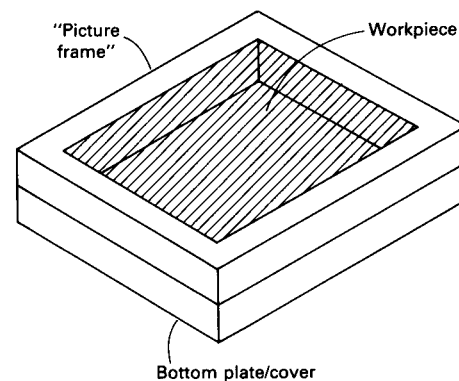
Pack used for roll welding. The top cover, which would be welded in place before rolling, is not shown.
